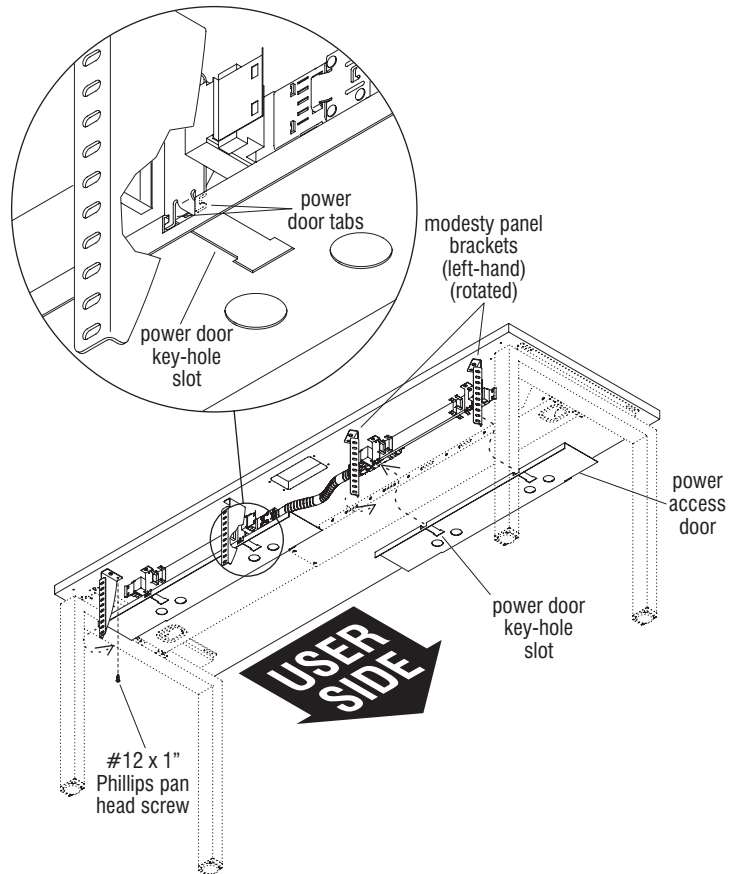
Single-Sided Fixed Benching Power Access Door Installation
